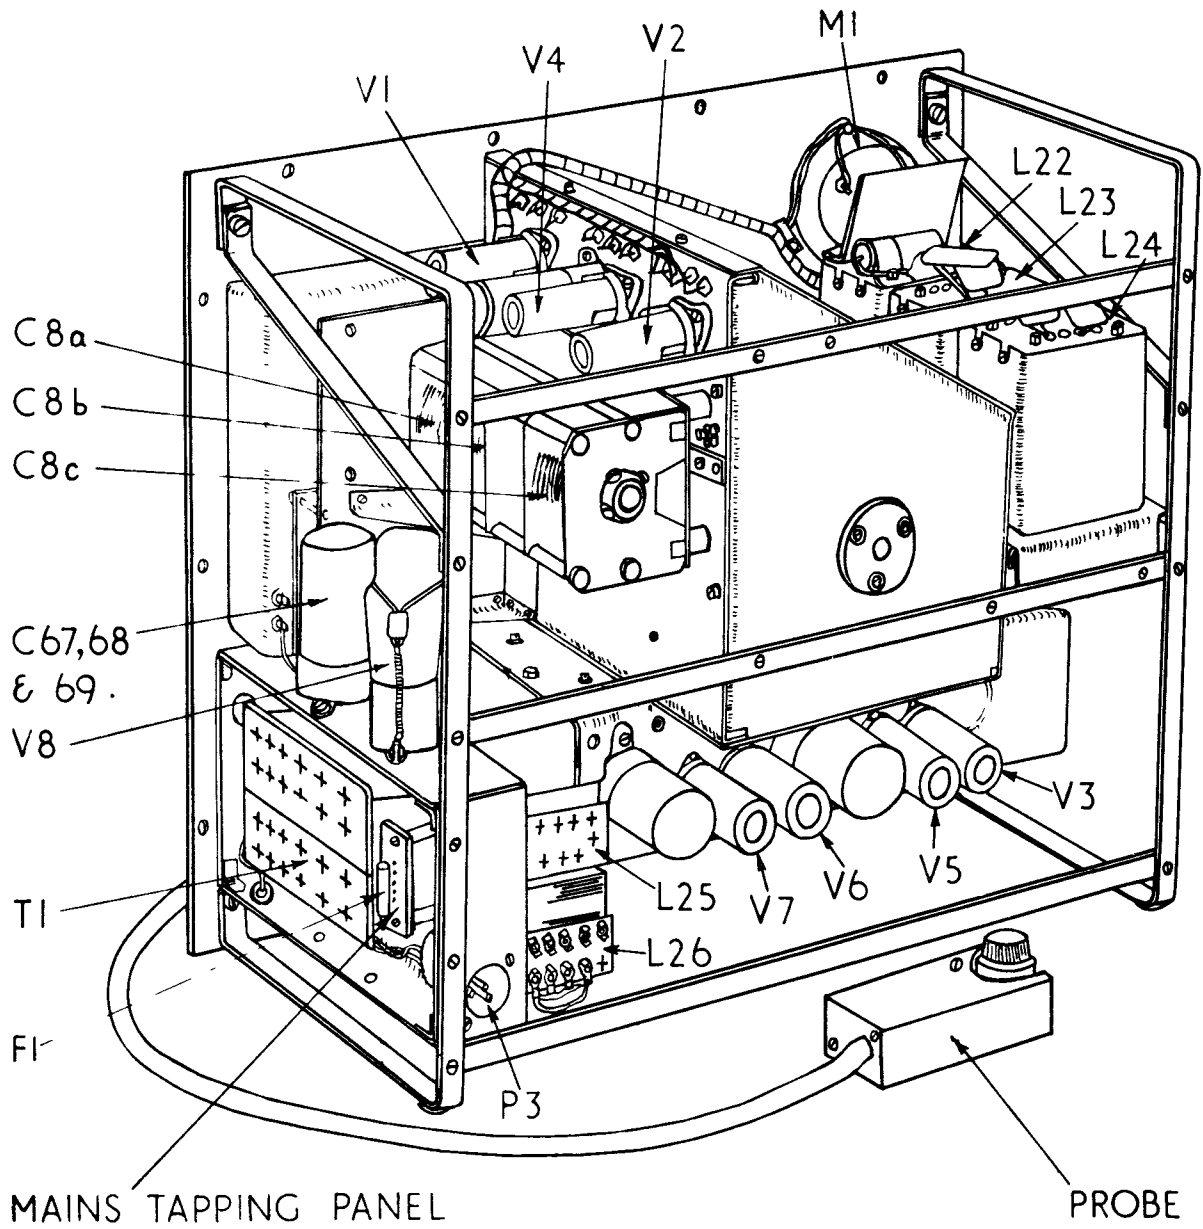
WAVE ANALYSER TYPE 853. REAR VIEW.
